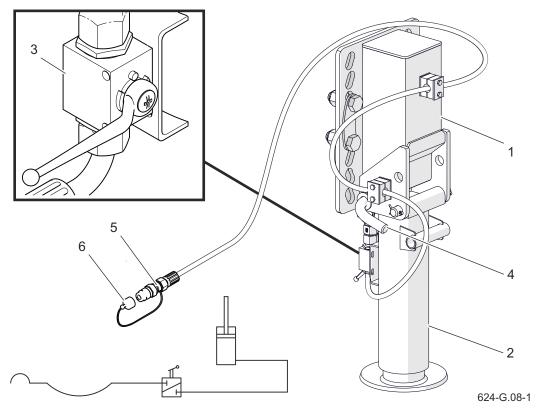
Construction and diagram of the hydraulic installation of the broken support
